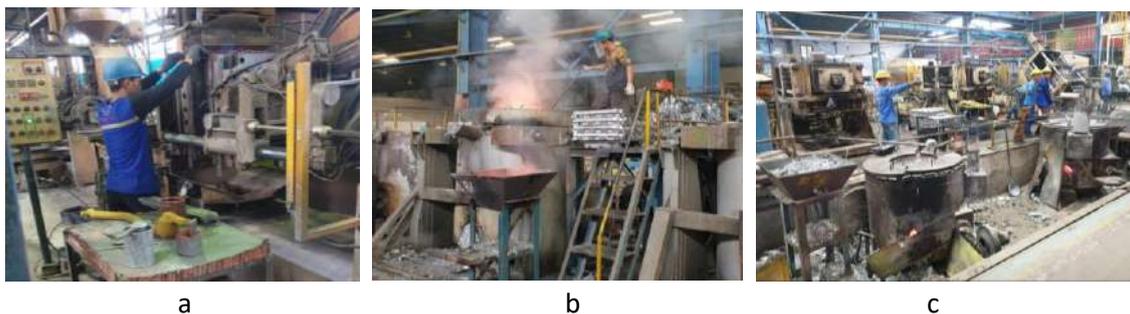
a. Sand Core Making Process, b. Melting of Metal, c. Casting Process
